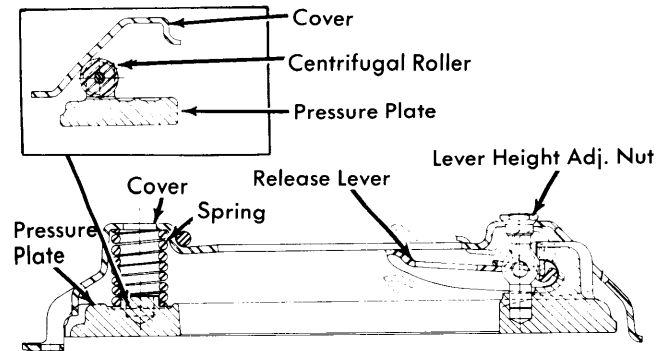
Cross Sectional View of Chrysler Corp. Clutch
